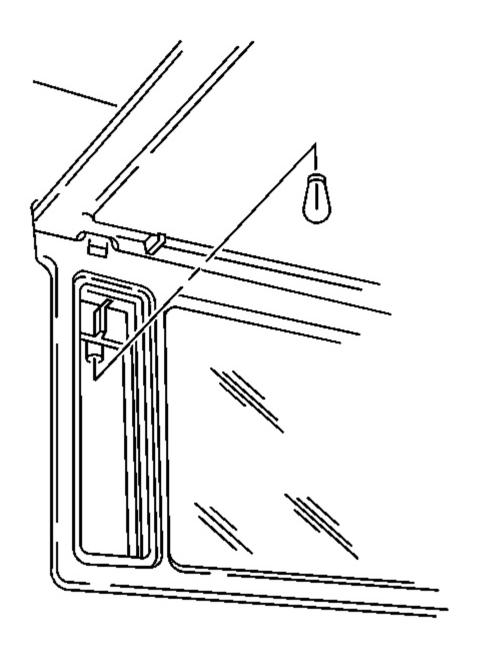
Bulb To Socket Courtesy of GENERAL MOTORS CORP.
